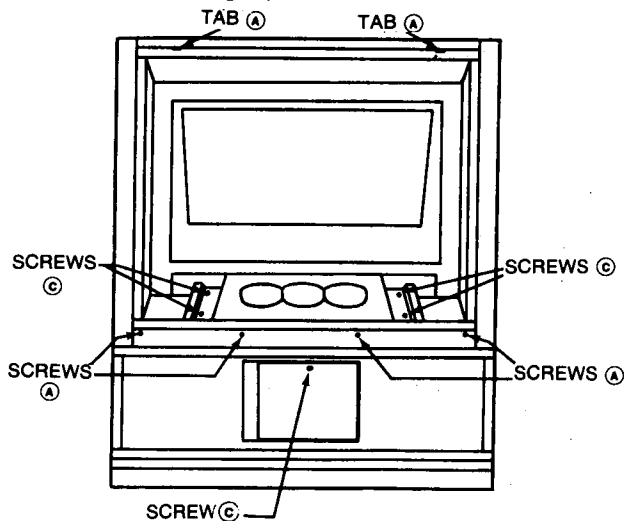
Cabinet Front View (Speaker Grille and Screen Removed) Models: 46GW950, P46100/150, P52150
